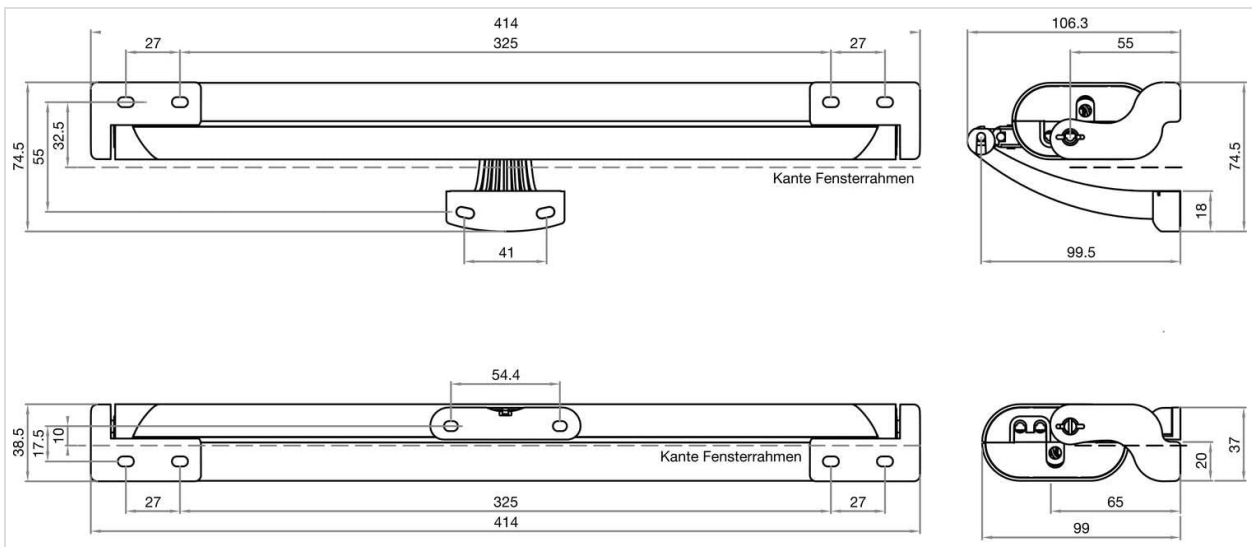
Technical drawing showing the dimensions and mounting points of the chain motor.
